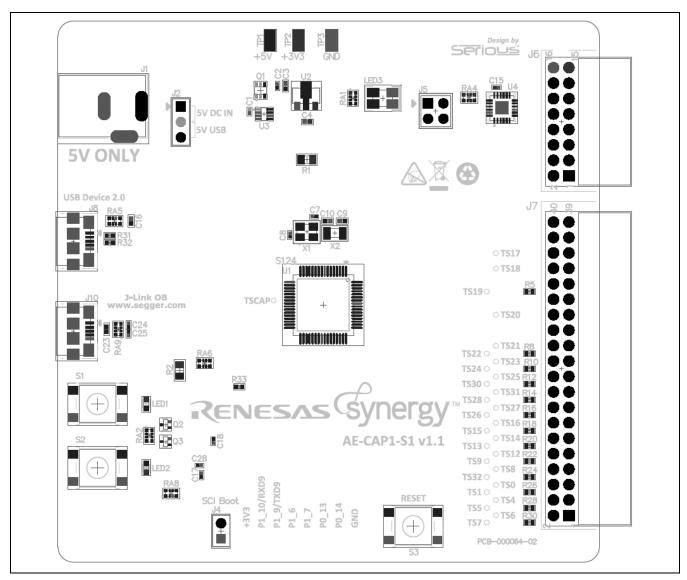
AE-CAP1-S1 Target Board Overall Component Placement, Top
